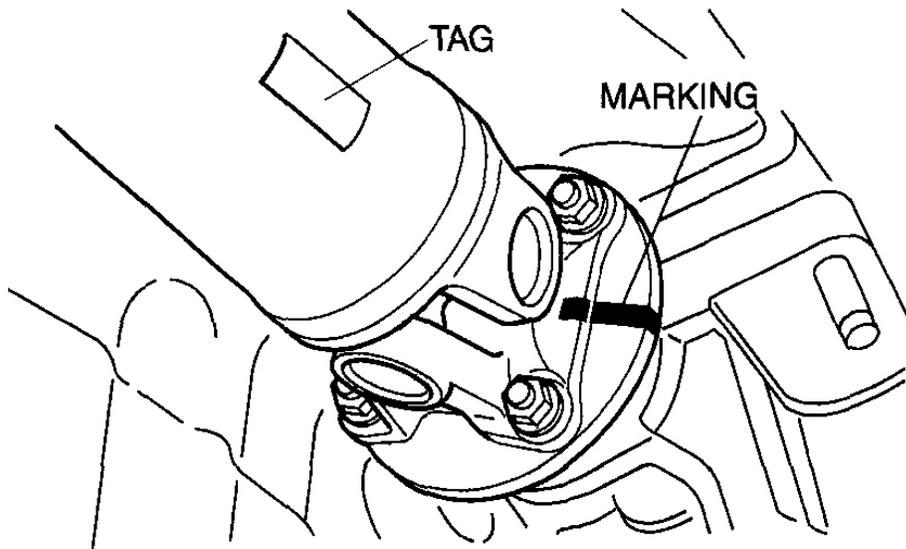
Identifying Propeller Shaft Components (With Torque Specifications)
